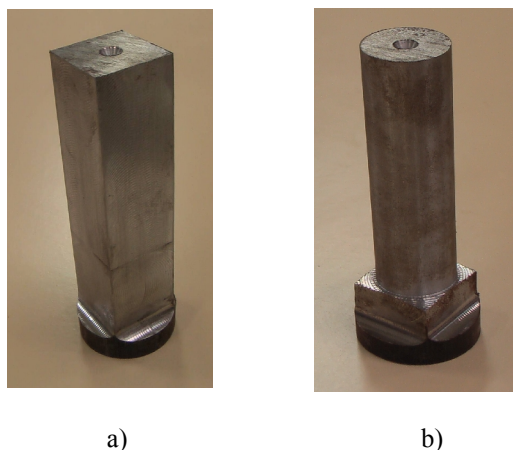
Specimens geometry for the interrupted turning tests (a) starting geometry and (b) final geometry.
